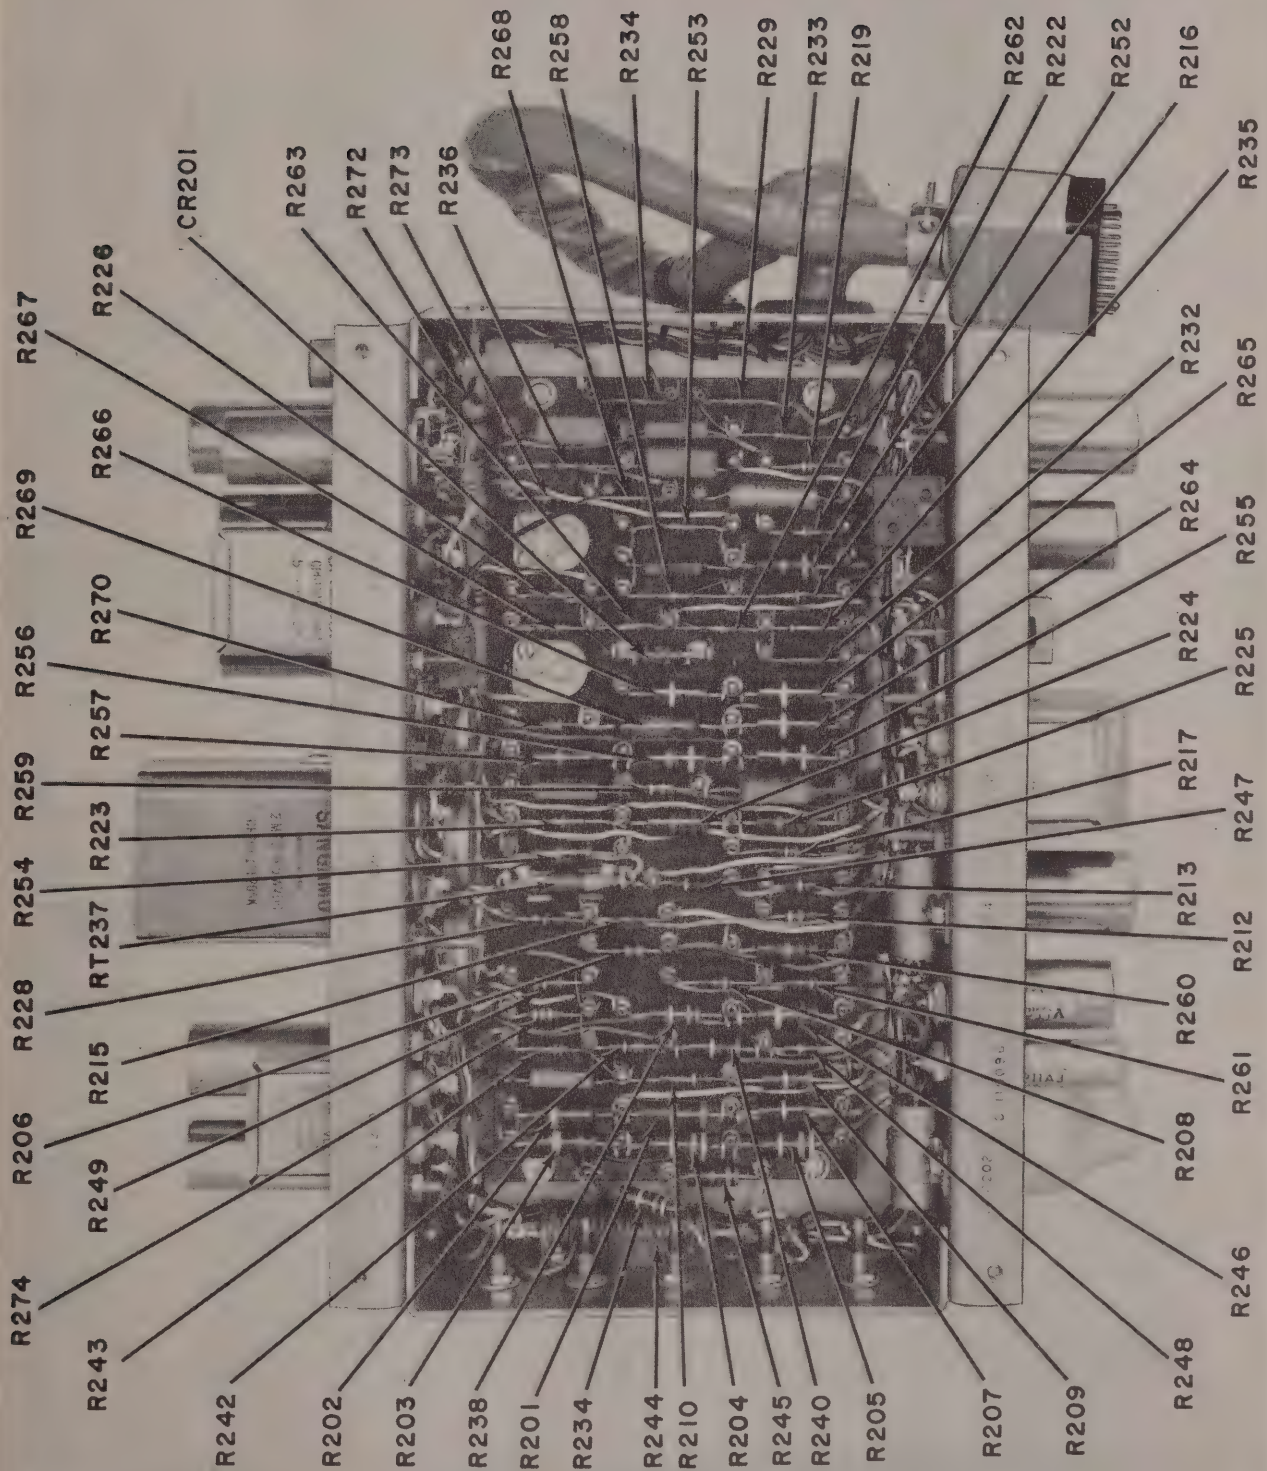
Modulator Chassis, Bottom View (Sheet 1 of 2)
